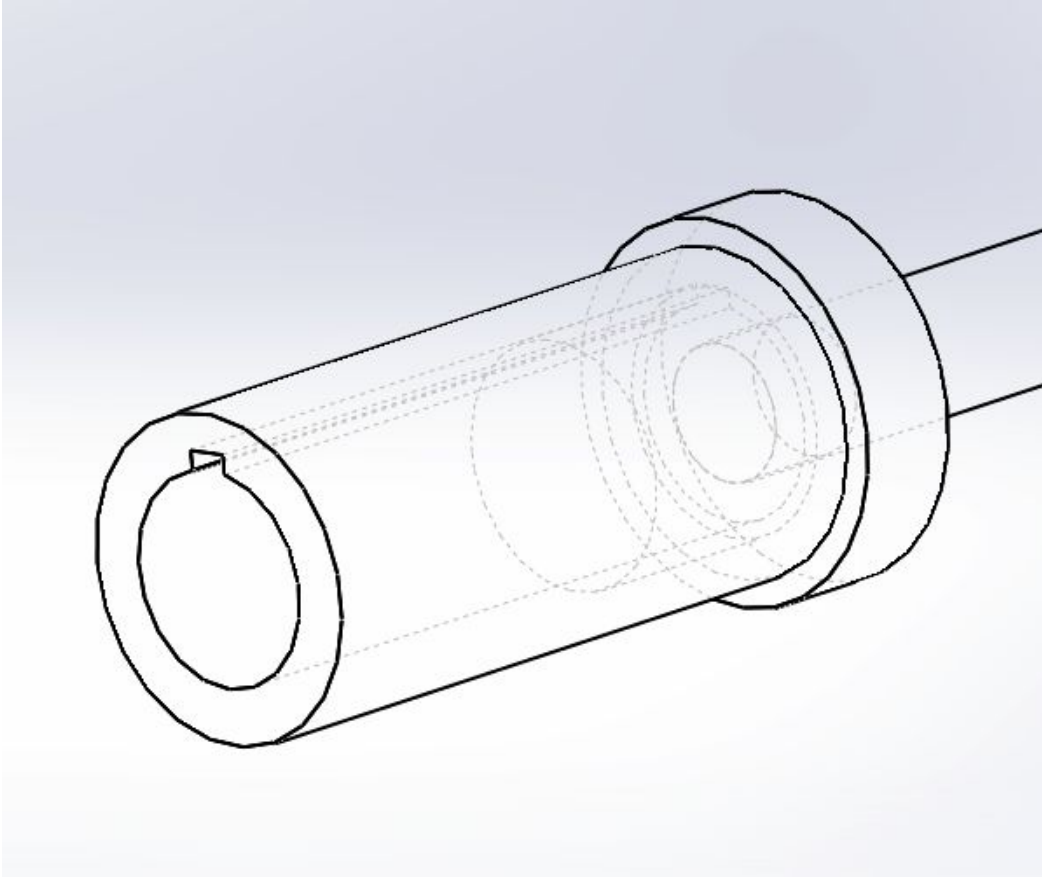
Transparent View of Driveshaft, Sleeve, and End Cap Assembly
